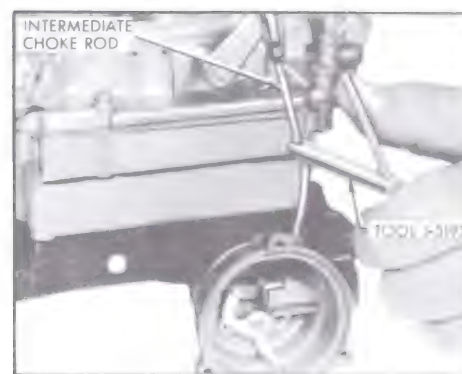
Adjusting Choke Piston just closed, then tighten screws and retainers. See paragraph 3-8.
